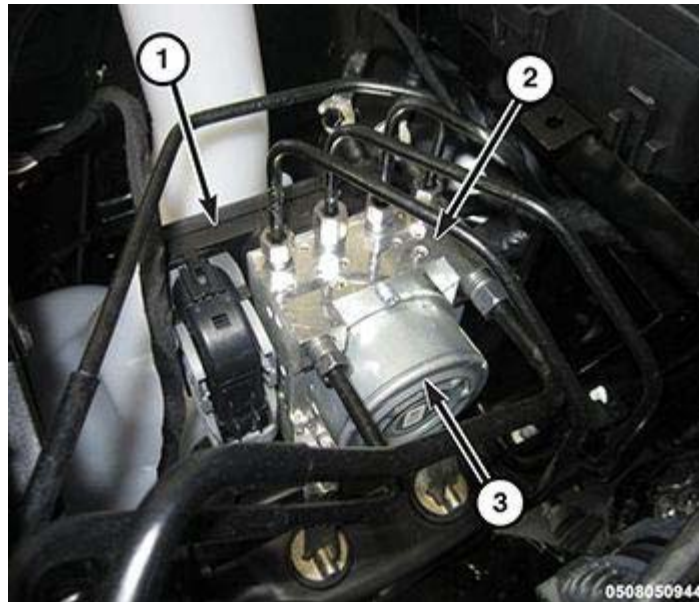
Antilock Brake Module (ABM) & Hydraulic Control Unit (HCU)
